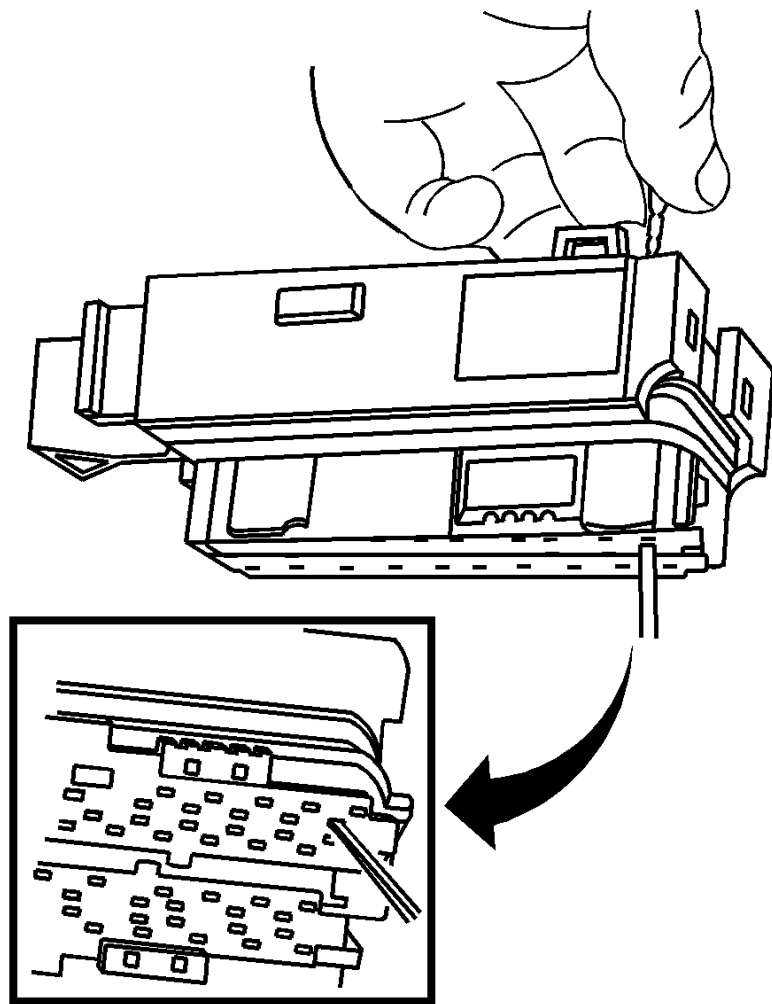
Inserting Special Tool Into Terminal Release Cavity
